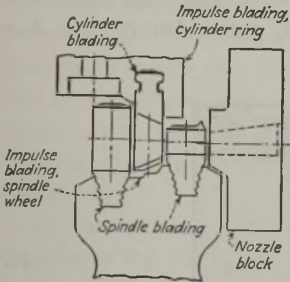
Impulse blades and method of attaching them in Allis-Chalmers turbine.
